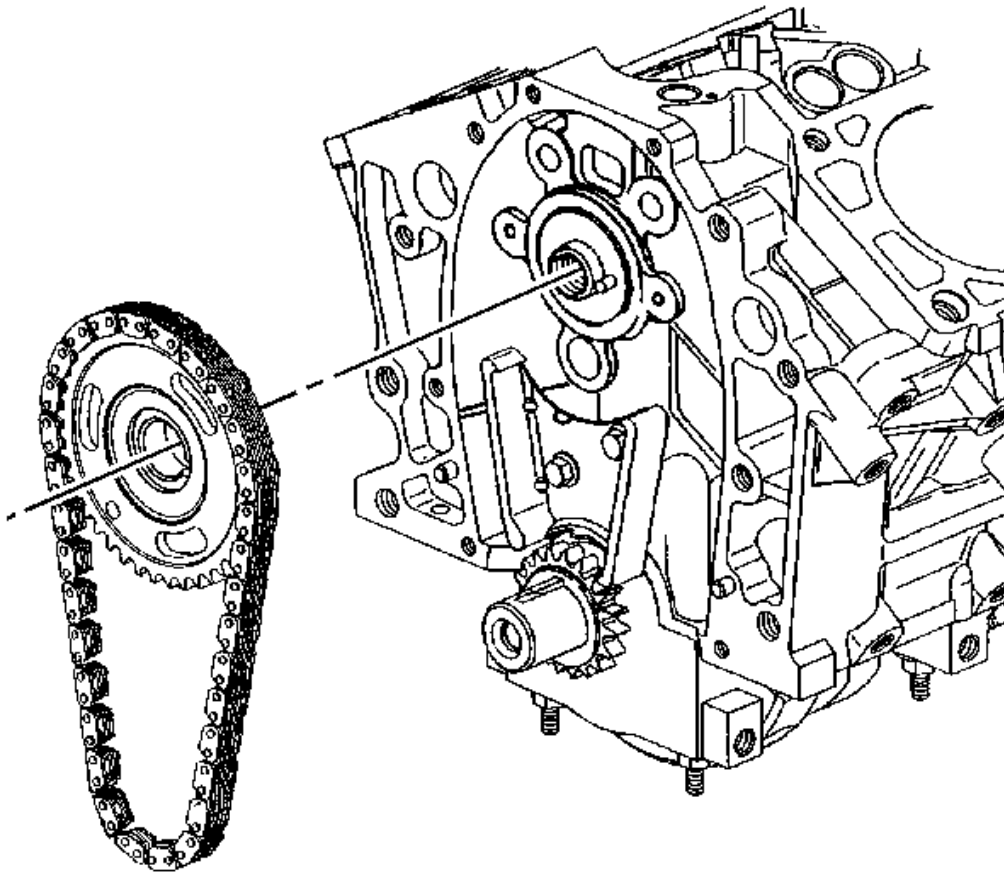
View Of Camshaft Sprocket With Timing Chain
